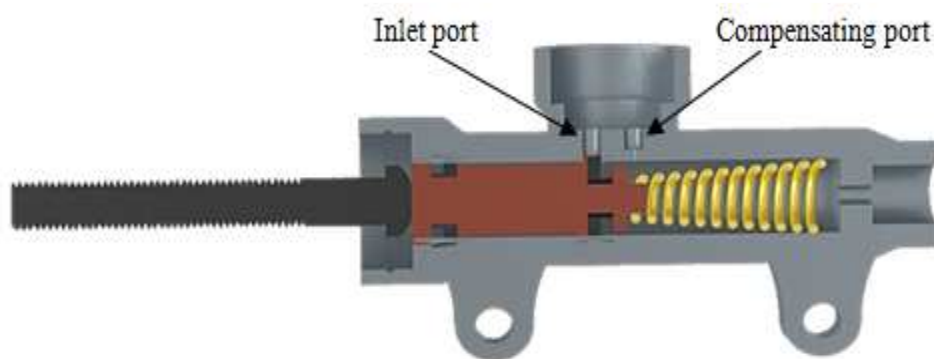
Normal Condition of Master Cylinder Assembly (CAD Model-Sectional View).
